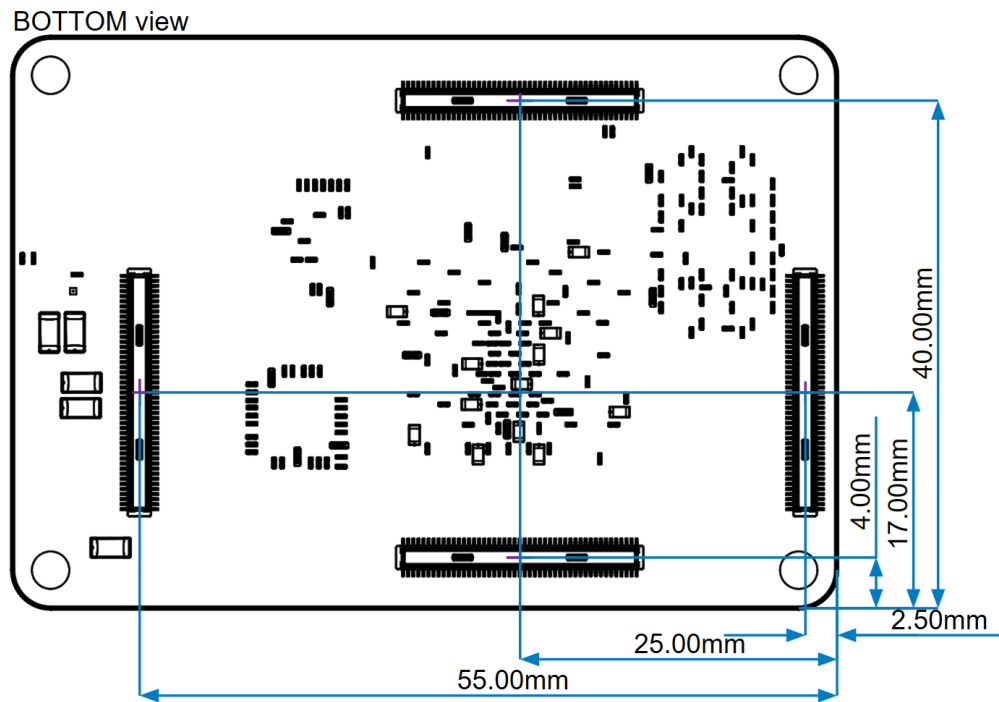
RCHD-PF Bottom View Mechanics in millimeters
